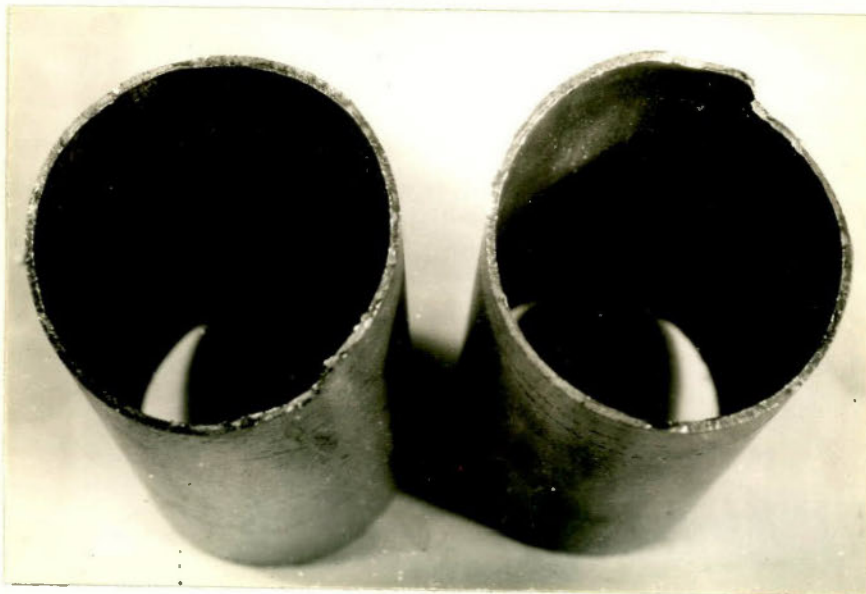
shows the parts as received. Figure 2 shows the character of the fracture.
